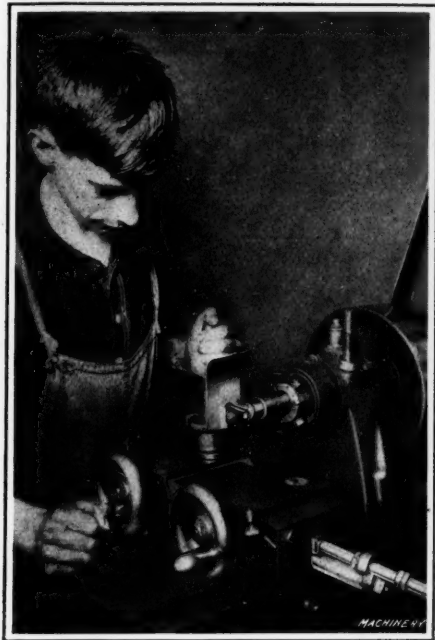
Butt Turning Breech End of Barrel on Shaving Machine
